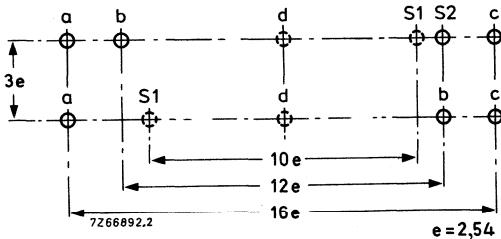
Hole pattern in the printed-wiring board for a tandem potentiometer (viewed on component side).
